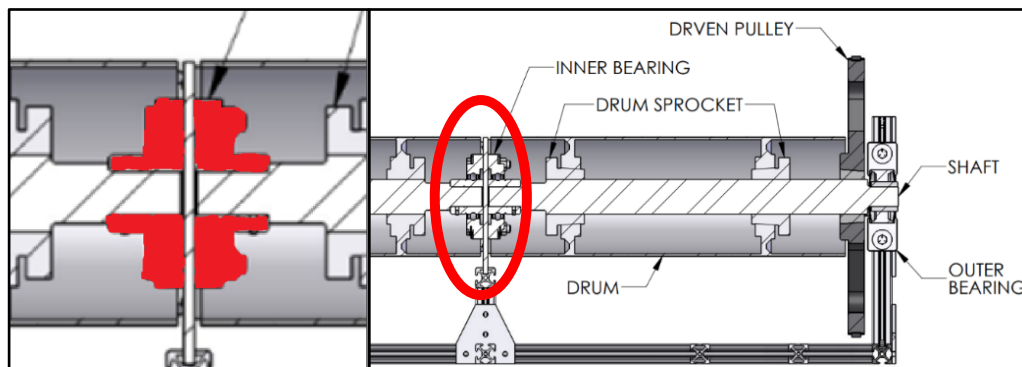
Cross Section of Shaft Showing Recessed Bearing.
